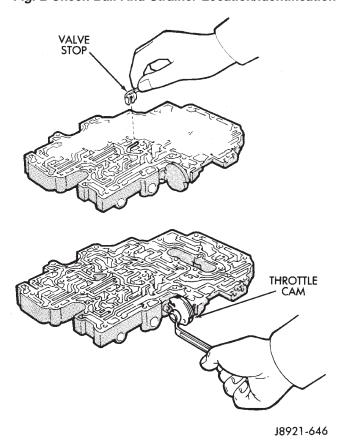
Removing/Installing Valve Stop And Throttle Cam
